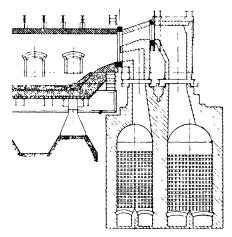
Removable blocks for tilting furnaces. (By courtesy of the Iron and Steel Institute)
